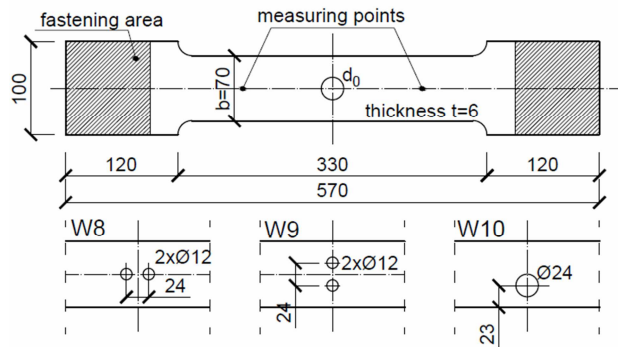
Geometry of single plate specimens (dimensions in mm)
